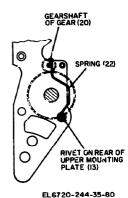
Spring location (spring (22, from fig. 3-9).
